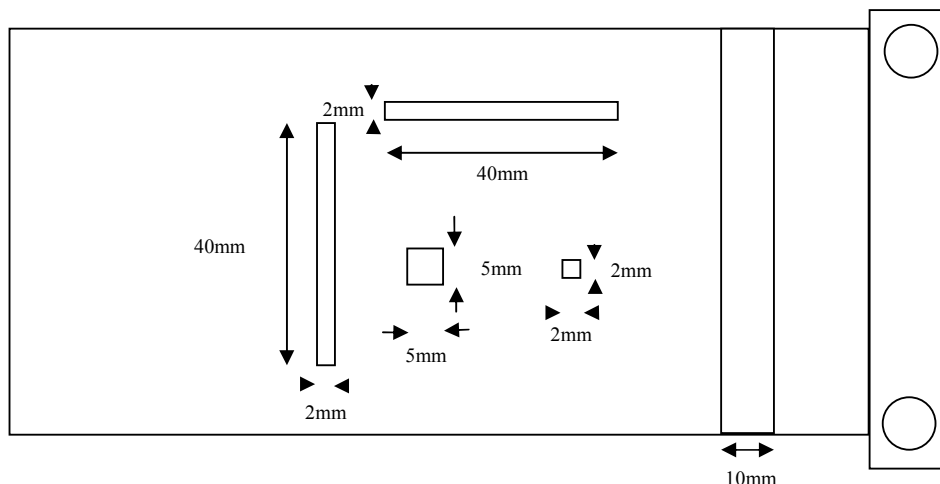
Schematic showing positions and dimensions of aluminium tape on Sample K.
